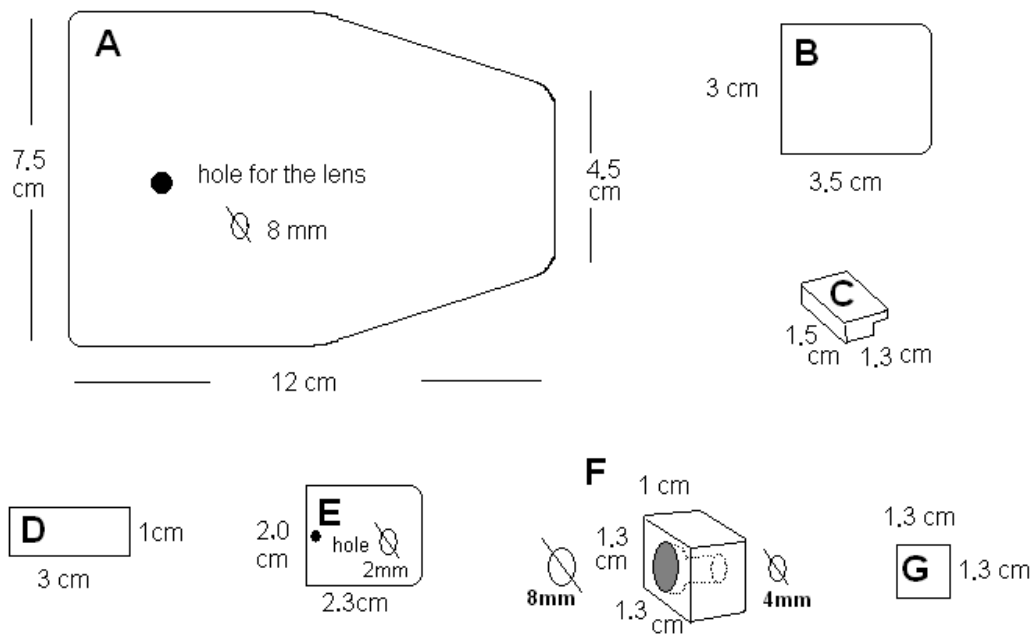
Dimensions of acrylic pieces needed to build the microscope. The pieces A, B, D, E and G are made with 3 mm thick acrylic, and the pieces C and F are made with 10 mm thick acrylic.
